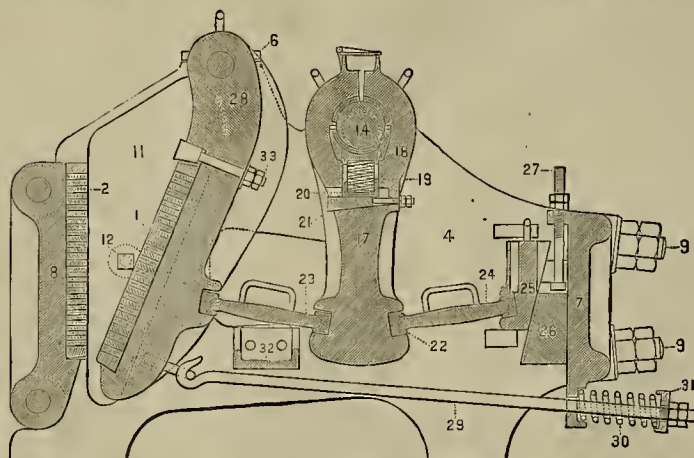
SECTIONAL VIEW OF FULTON ROCK-BREAKER
